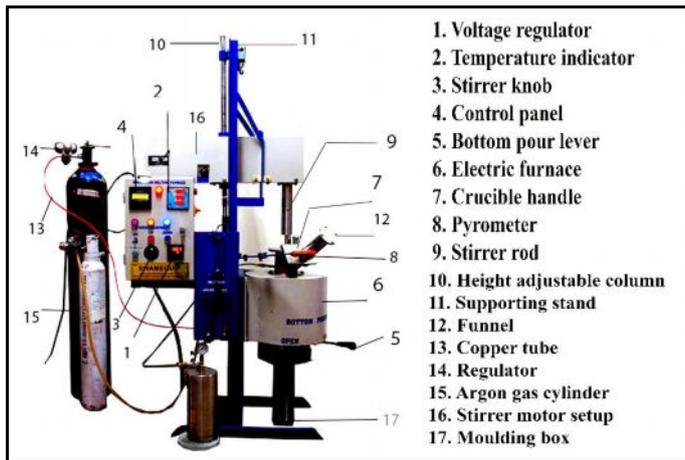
Photographic Image of Bottom Pouring Stir Casting Machine Evaluation of Corrosion Study
